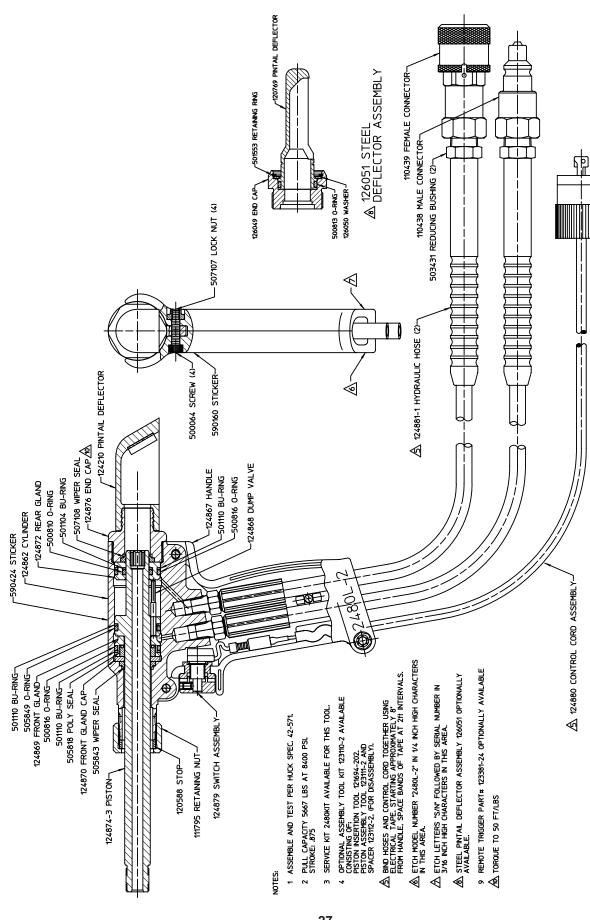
2480L-2 - Sectional View with Part Numbers
